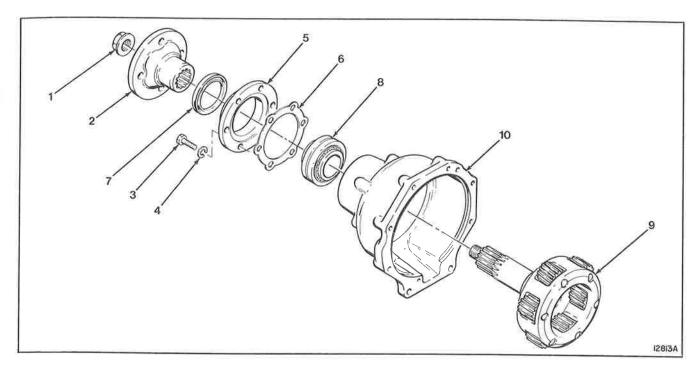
2.57:1 AND 2.91:1 Reduction Units - Early Production
